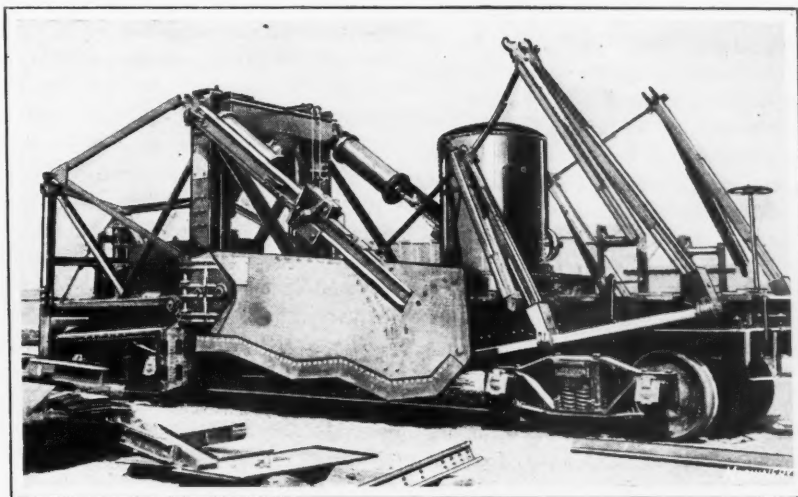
Railroad Ditcher fabricated by Oxy-acetylene Cutting
